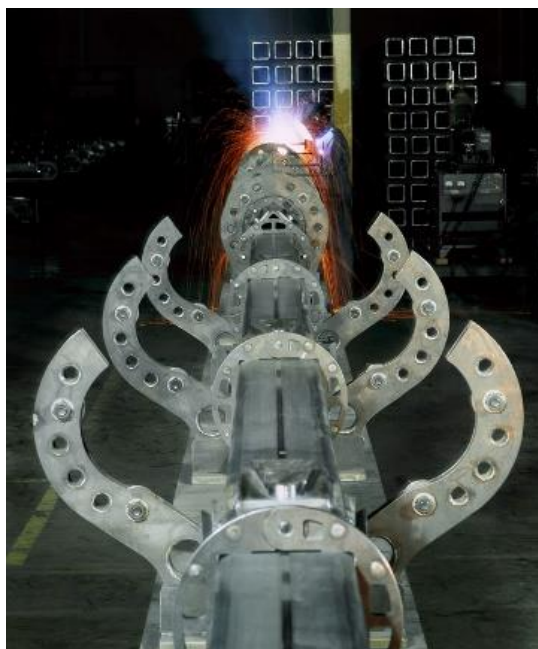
Jig to rotate beam assembly to allow for horizontal robotic welding
